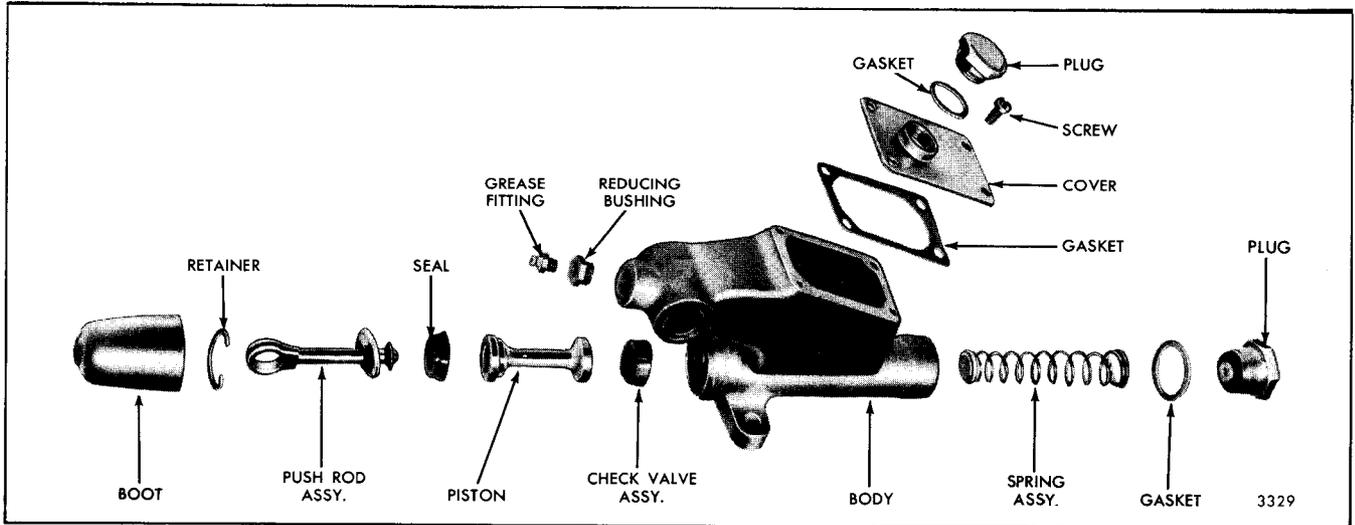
Hydraulic Starter Remote Control Master Cylinder Details and Relative Location of Parts
